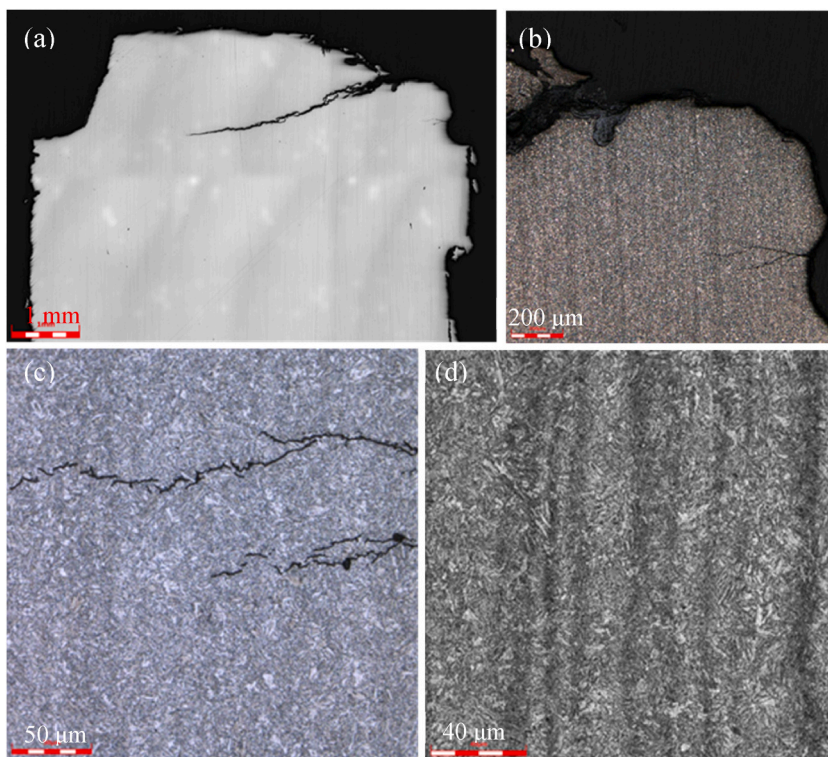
Fracture crack and metallographic structure analysis (a) Fracture appearance; (b) Crack morphology of the fracture surface; (c) Crack surface profile; (d) Metallurgical structure of the fracture.
